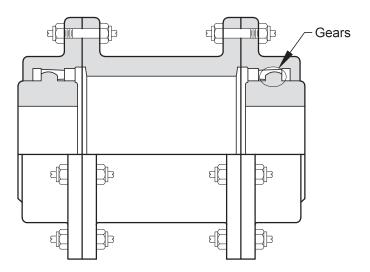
Cutaway of a Kop-Flex Continuously Lubricating gear-type coupling (top): assembled; (bottom): sectional view. Courtesy of Kop-Flex.
